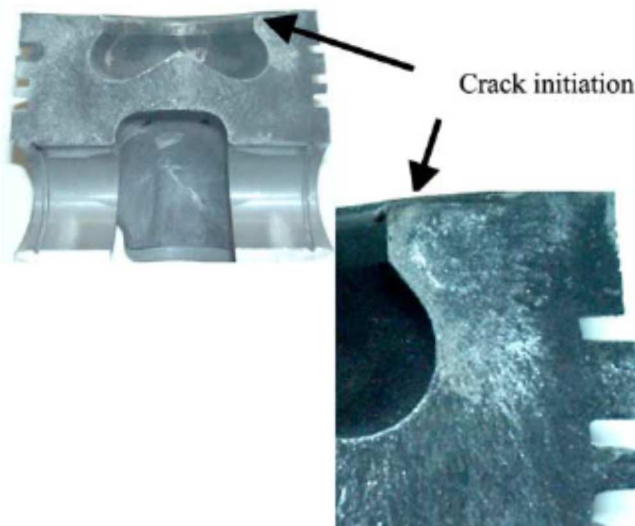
Premature failure of a diesel piston owing to fatigue cracking originating from the bowl rim area near the combustion chamber [4].
